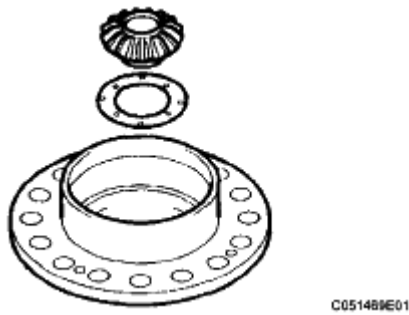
Identifying Differential Side Gear Thrust Washer And Center Differential Planetary Gear
